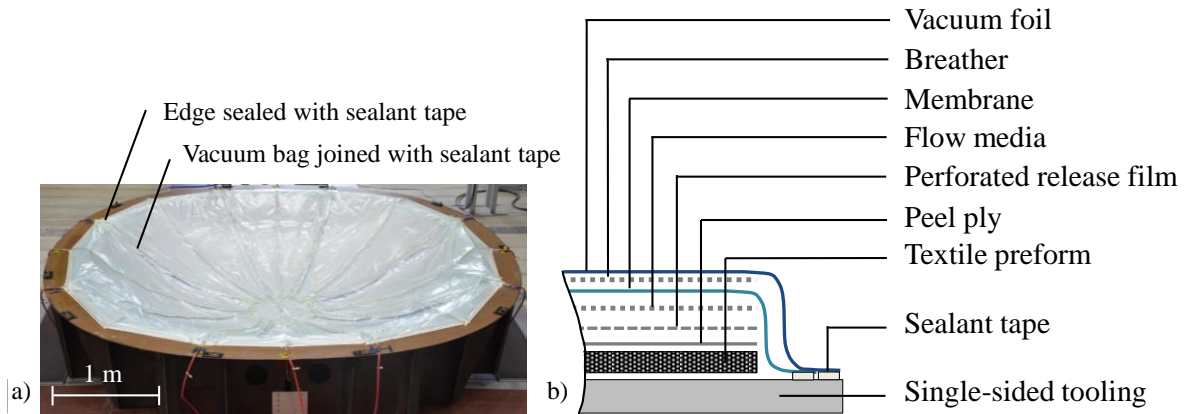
a) Demonstrator of rear pressure bulkhead (RPB) with sealed vacuum bag;
